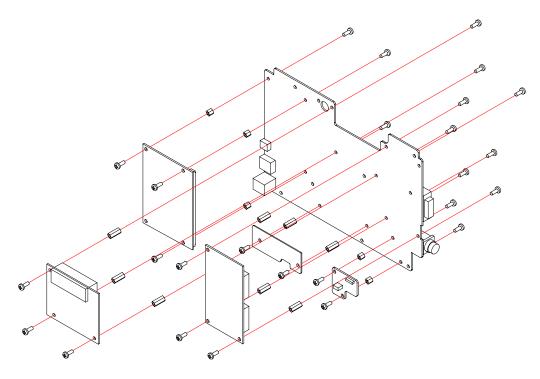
Rear Case Disassembly - ECG & Respiration Module, SpO_2 Module, CO_2 Module, CPU Module (For Nellcor SpO_2 Module)
